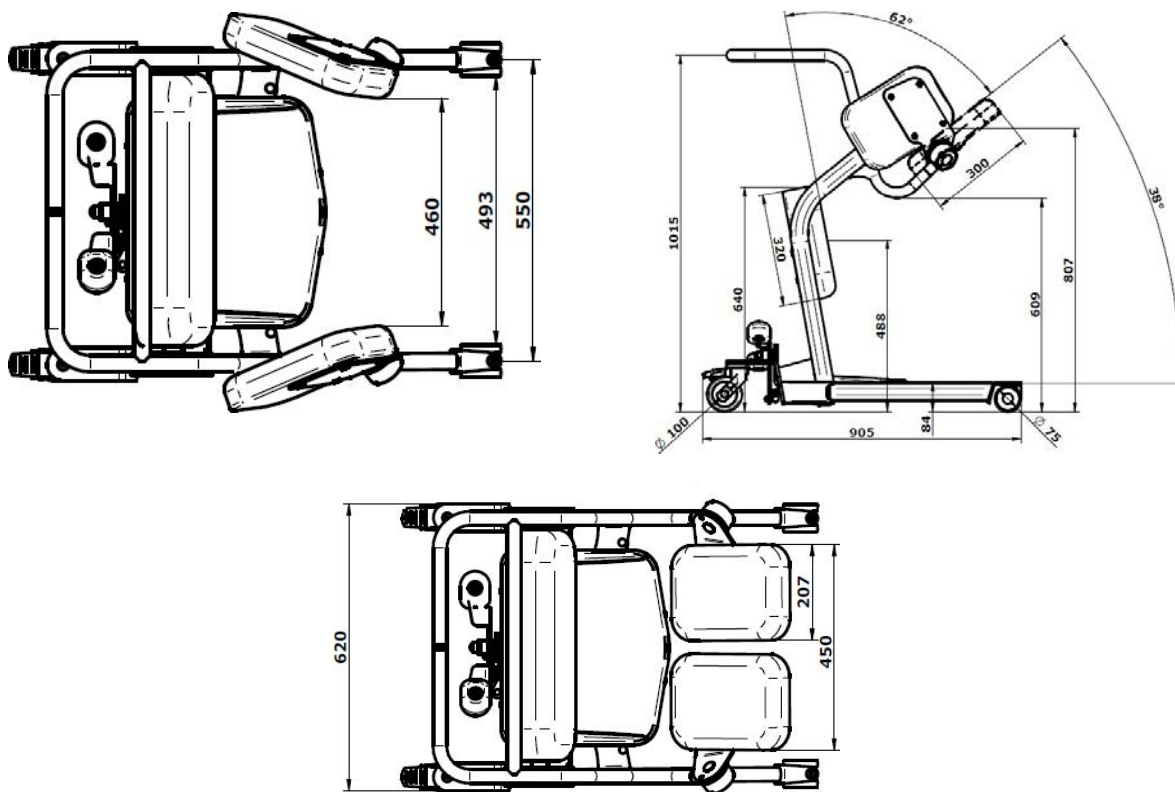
Elevand SteadyStand mobile patient lift dimensions (dimensions in mm)
